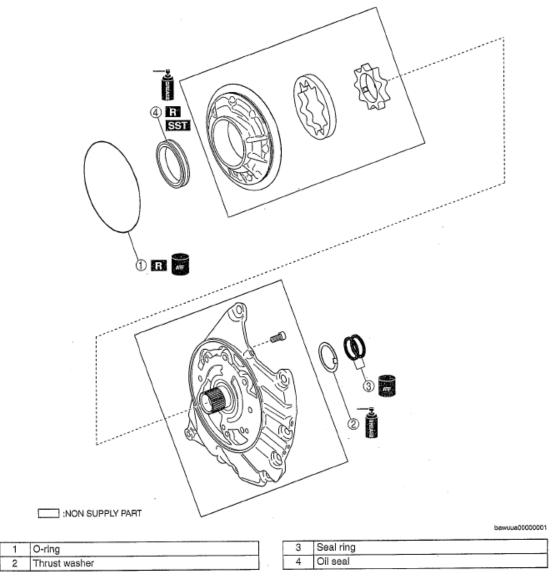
Identifying Oil Pump Components Courtesy of MAZDA MOTORS CORP.
